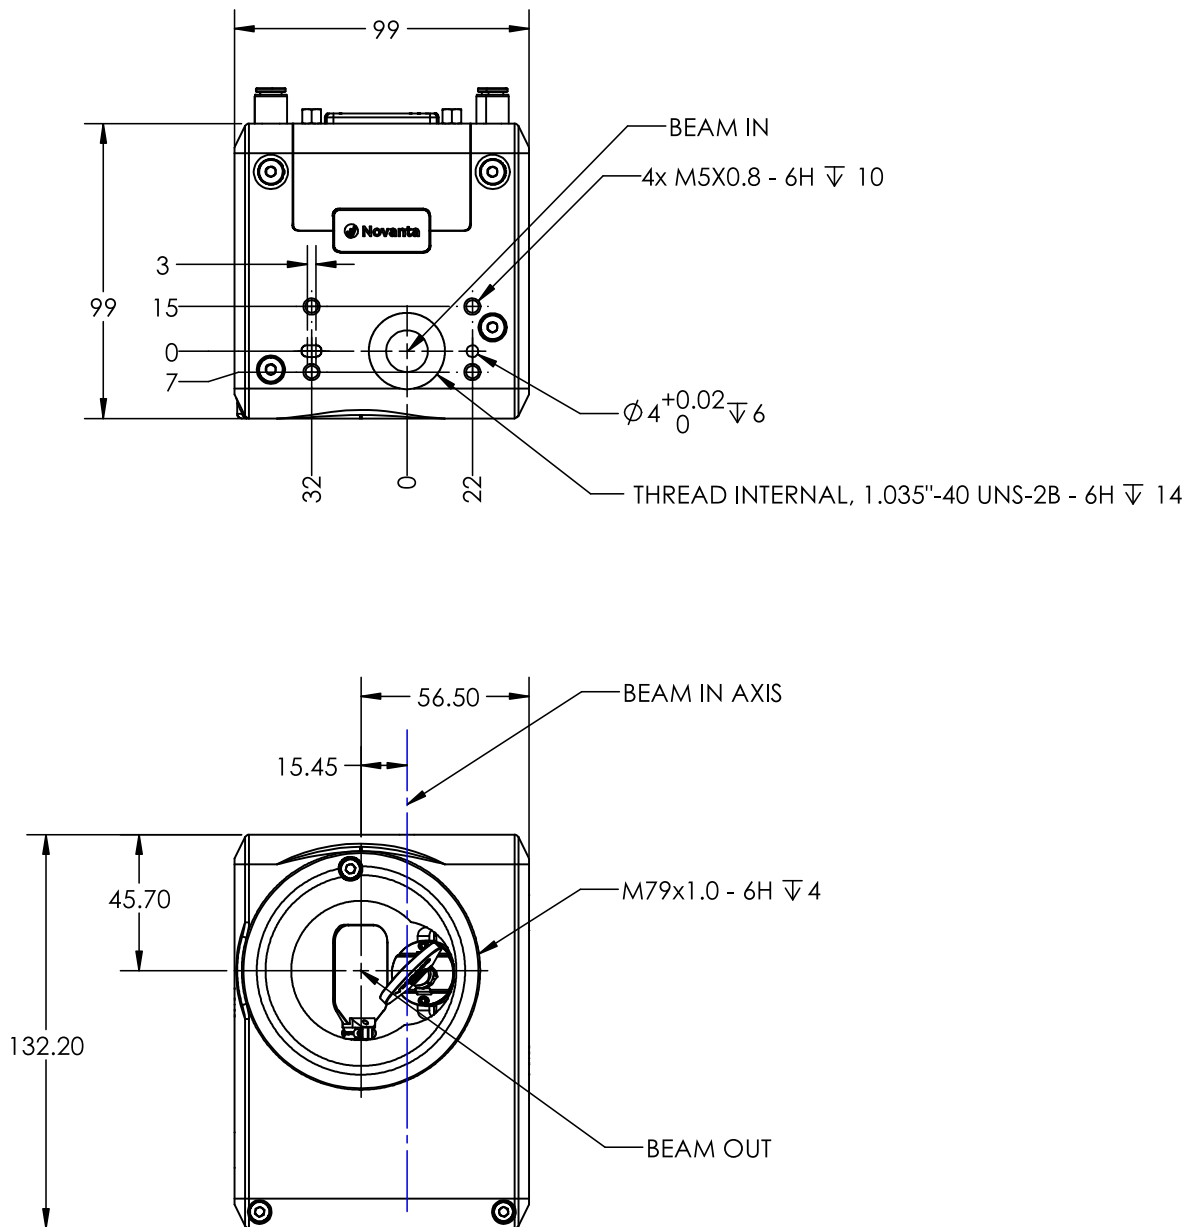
Dimensions of "top I/O"- and "side I/O"-variant in millimeters
